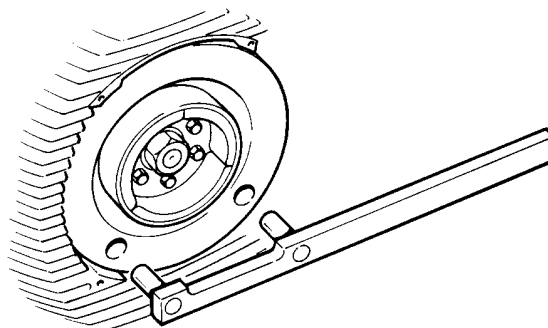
Using Flywheel Restrainer Part No 50-0231
